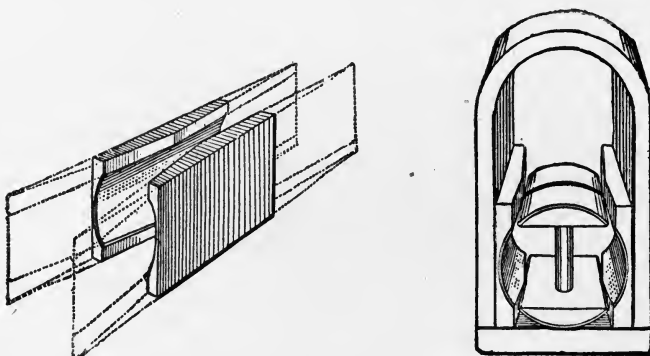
Wedge-shaped pole pieces used on older model Eisemann magnetos.
